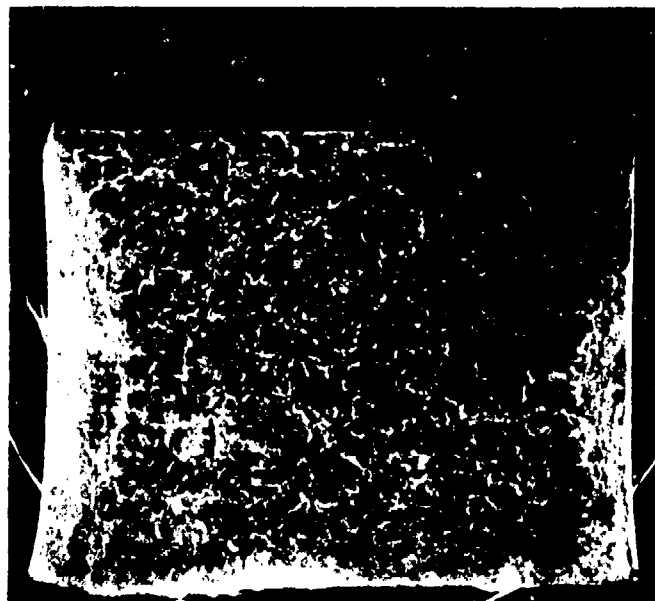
Fracture surface of an A-242 transverse Charpy specimen tested at 23°C, 10x.
